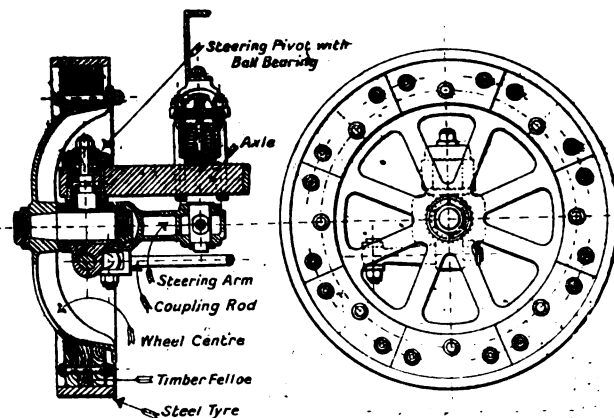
Section and Elevation of Front Wheels of "Sentinel" Motor Wagon.
